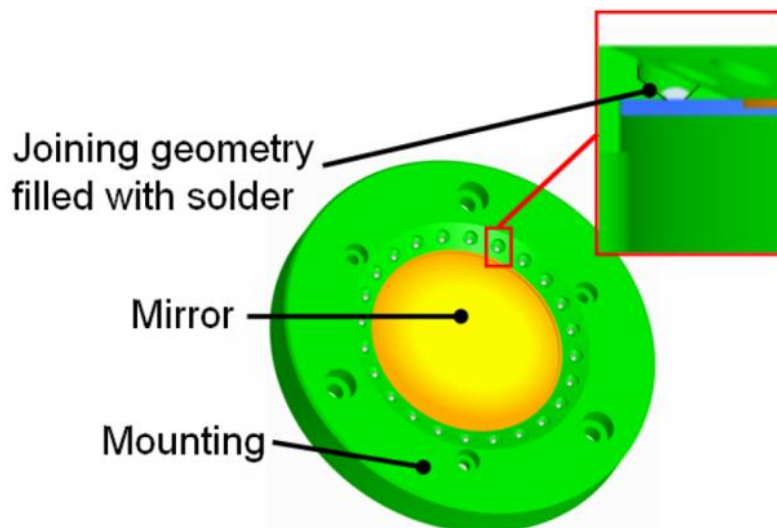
Design of the mounting and attached mirror including a detailed view of the conical joining geometry that allows the solder to form a joint between the mirror and the mount.
